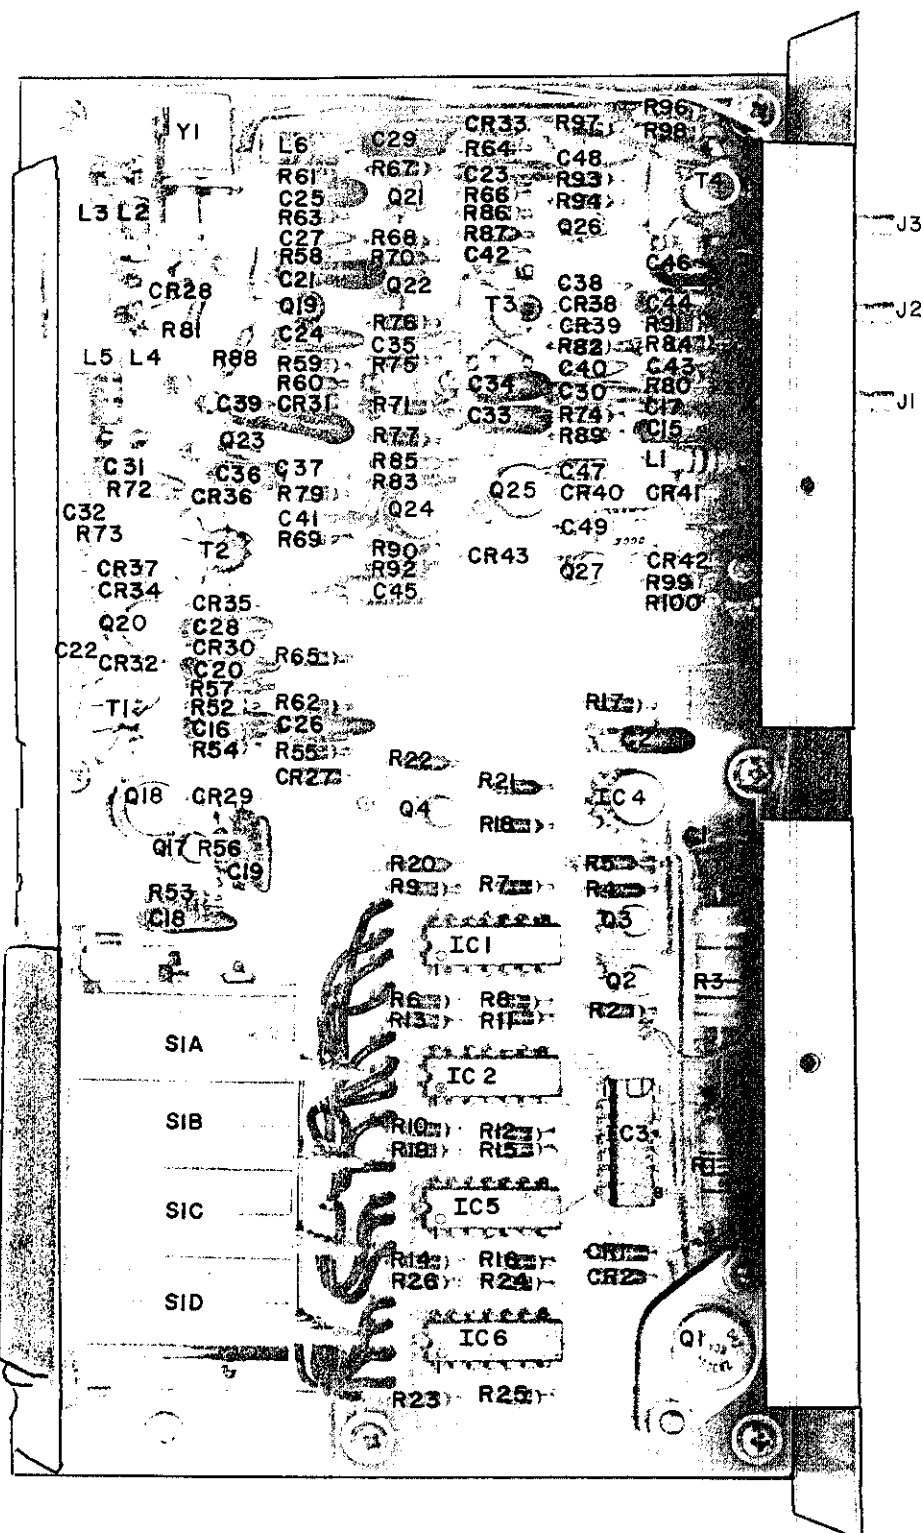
Synthesizer Assembly A1 Phase Locked Oscillator Section, Series 1040A
